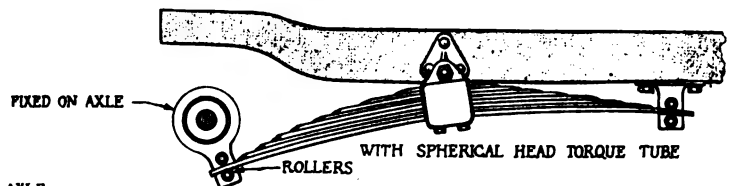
Roller supports enclosed in grease retaining housings on Lanchester
